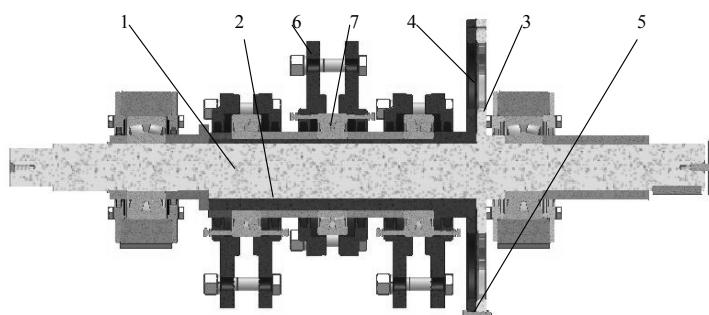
Loading mechanism / Mecanismul de încărcare.
